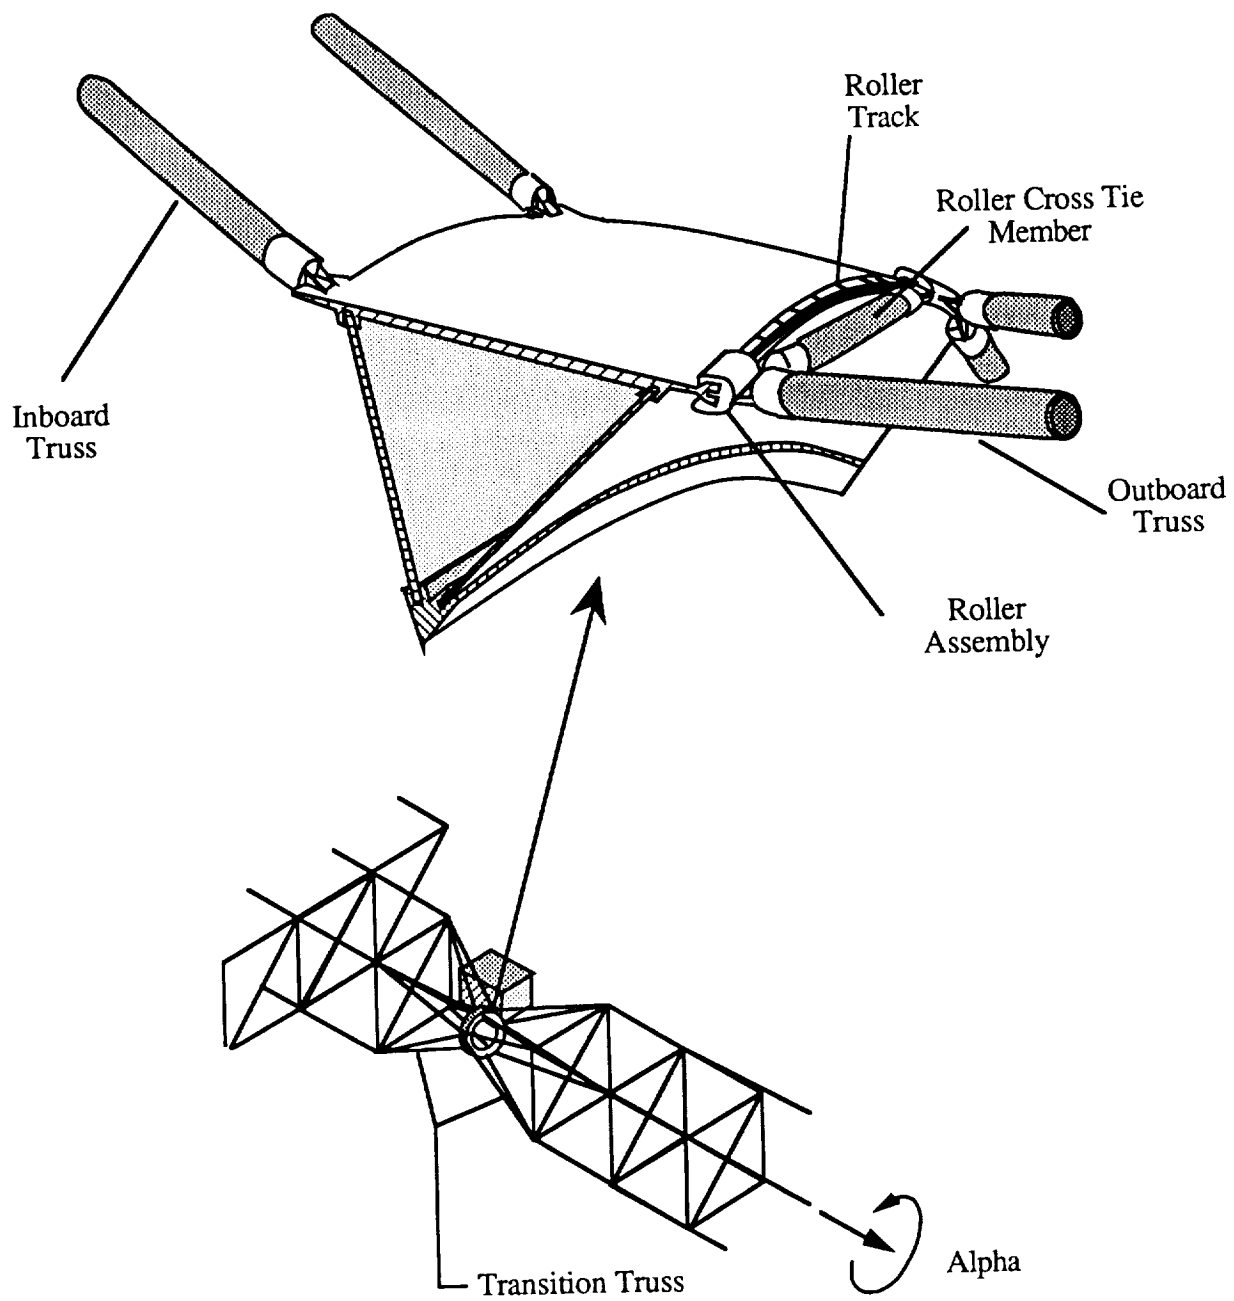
Section of the Solar Alpha Joint Assembly.
